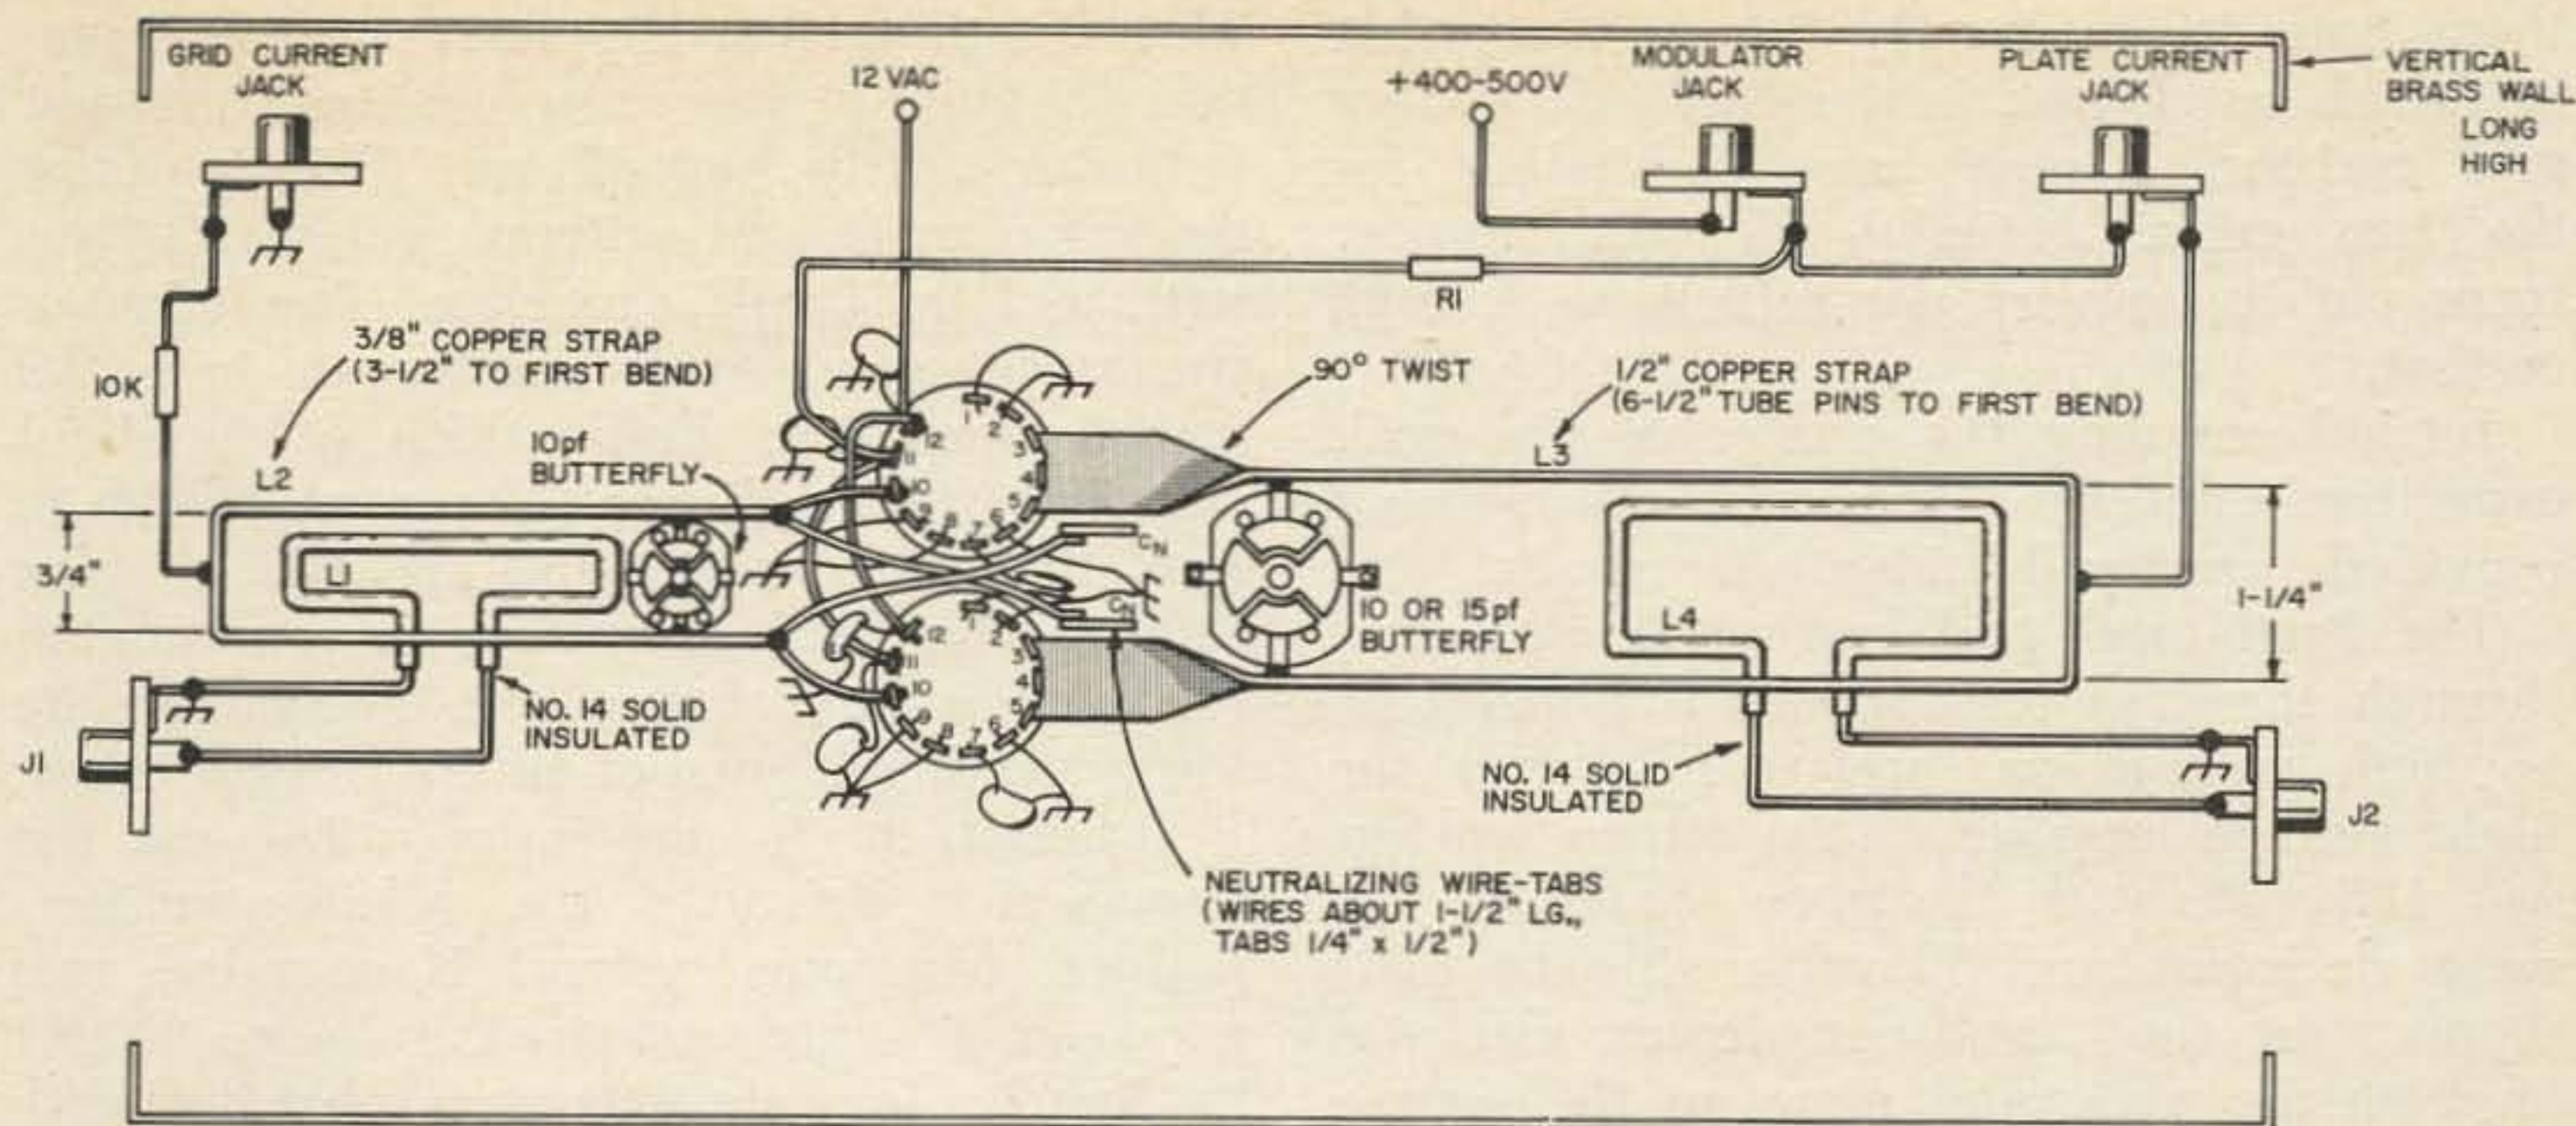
Layout, coils and details of the two meter Compactron final. This drawing is one-third size.
